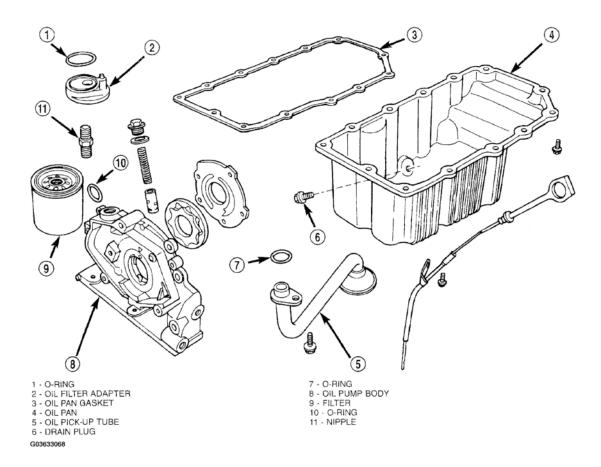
Identifying Engine Lubrication Components Courtesy of DAIMLERCHRYSLER CORP.
